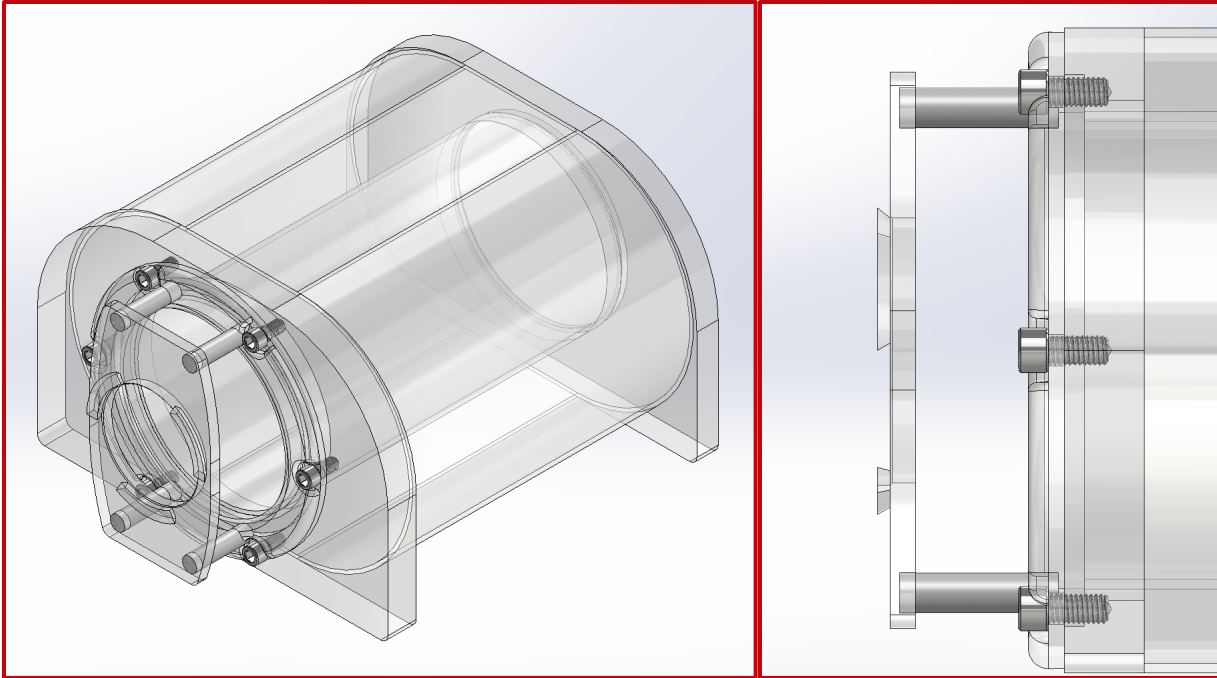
3D-rendering isotropic view (left) of the modified hollow body oval with an adapter piece on the front face to attach the dovetail interface (right). This modified oval will allow for a larger cylindrical module to be inserted to accommodate the fabricated heart.
